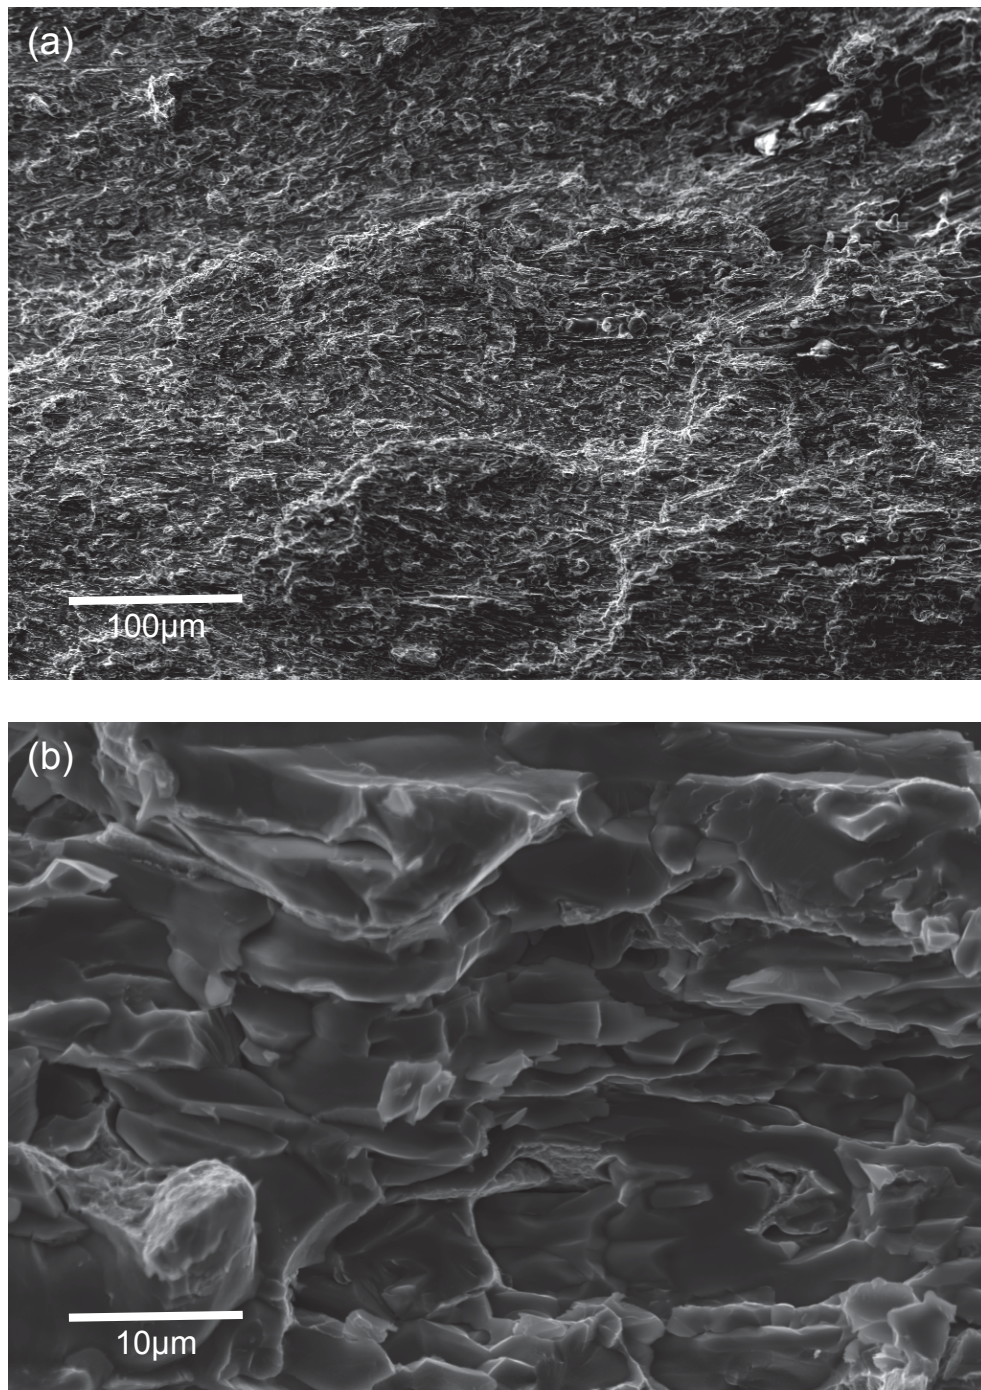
(a) Fracture surface of white iron after 3-point test. (HWOFF = 600 μm) (b) shows the brittle fracture surface of this material. (HWOFF = 60 μm)
